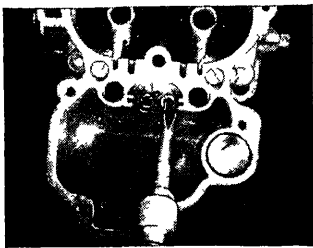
Install metering rod jets and gaskets. Jets must be installed snugly but not so tight as to cause distortion
